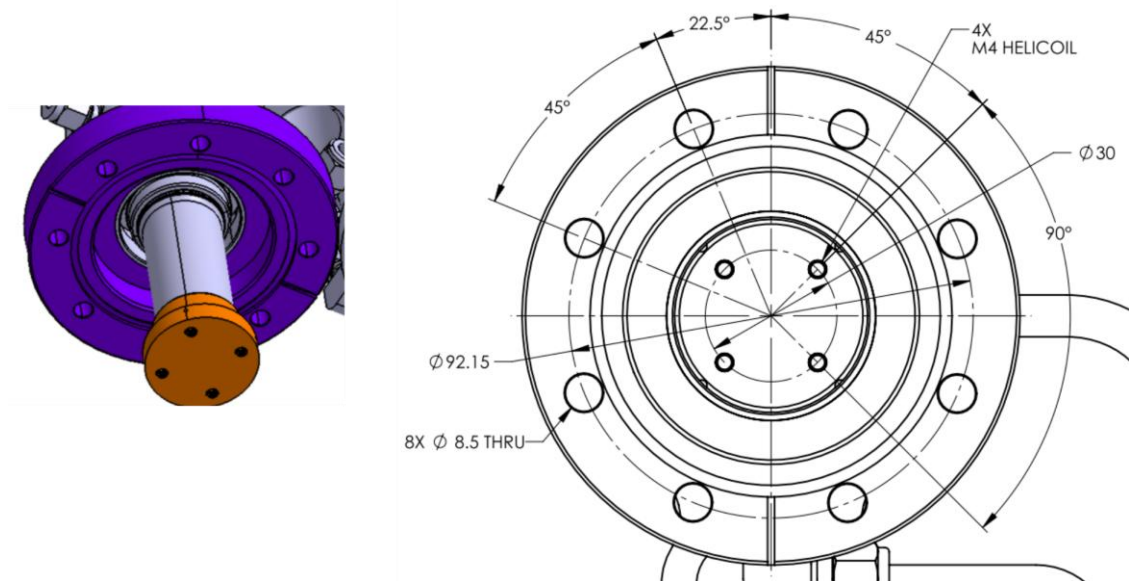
Screw hole pattern at the cold tip of the cryocooler.
